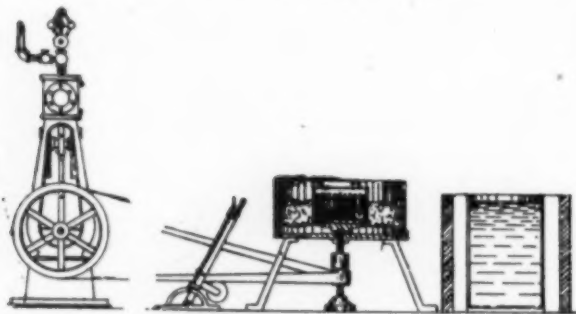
WIRE COIL GALVANIZING MACHINE.
